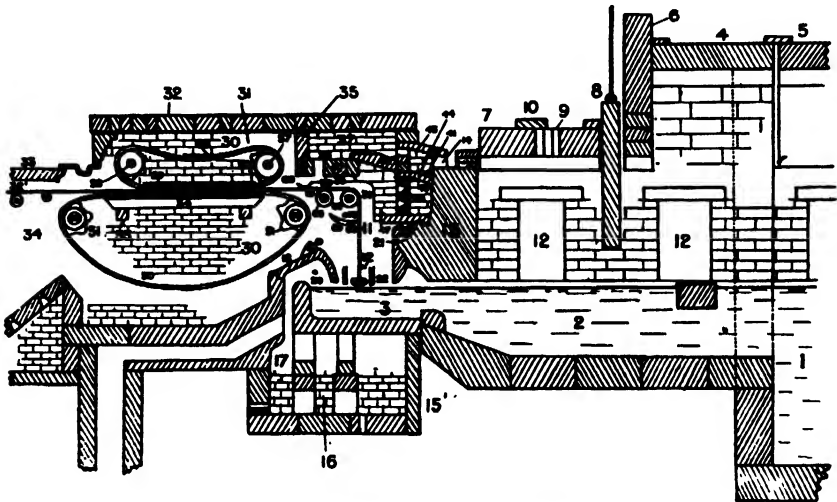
THE LIBBEY-OWENS (COLBURN) SHEET DRAWING PROCESS.
